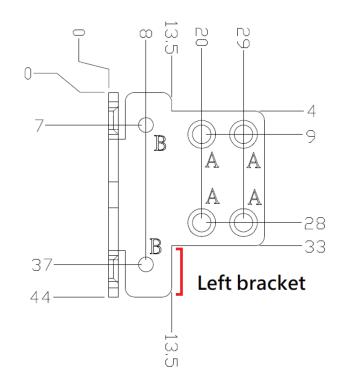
MOUNTING BOXILLA STEP 6
